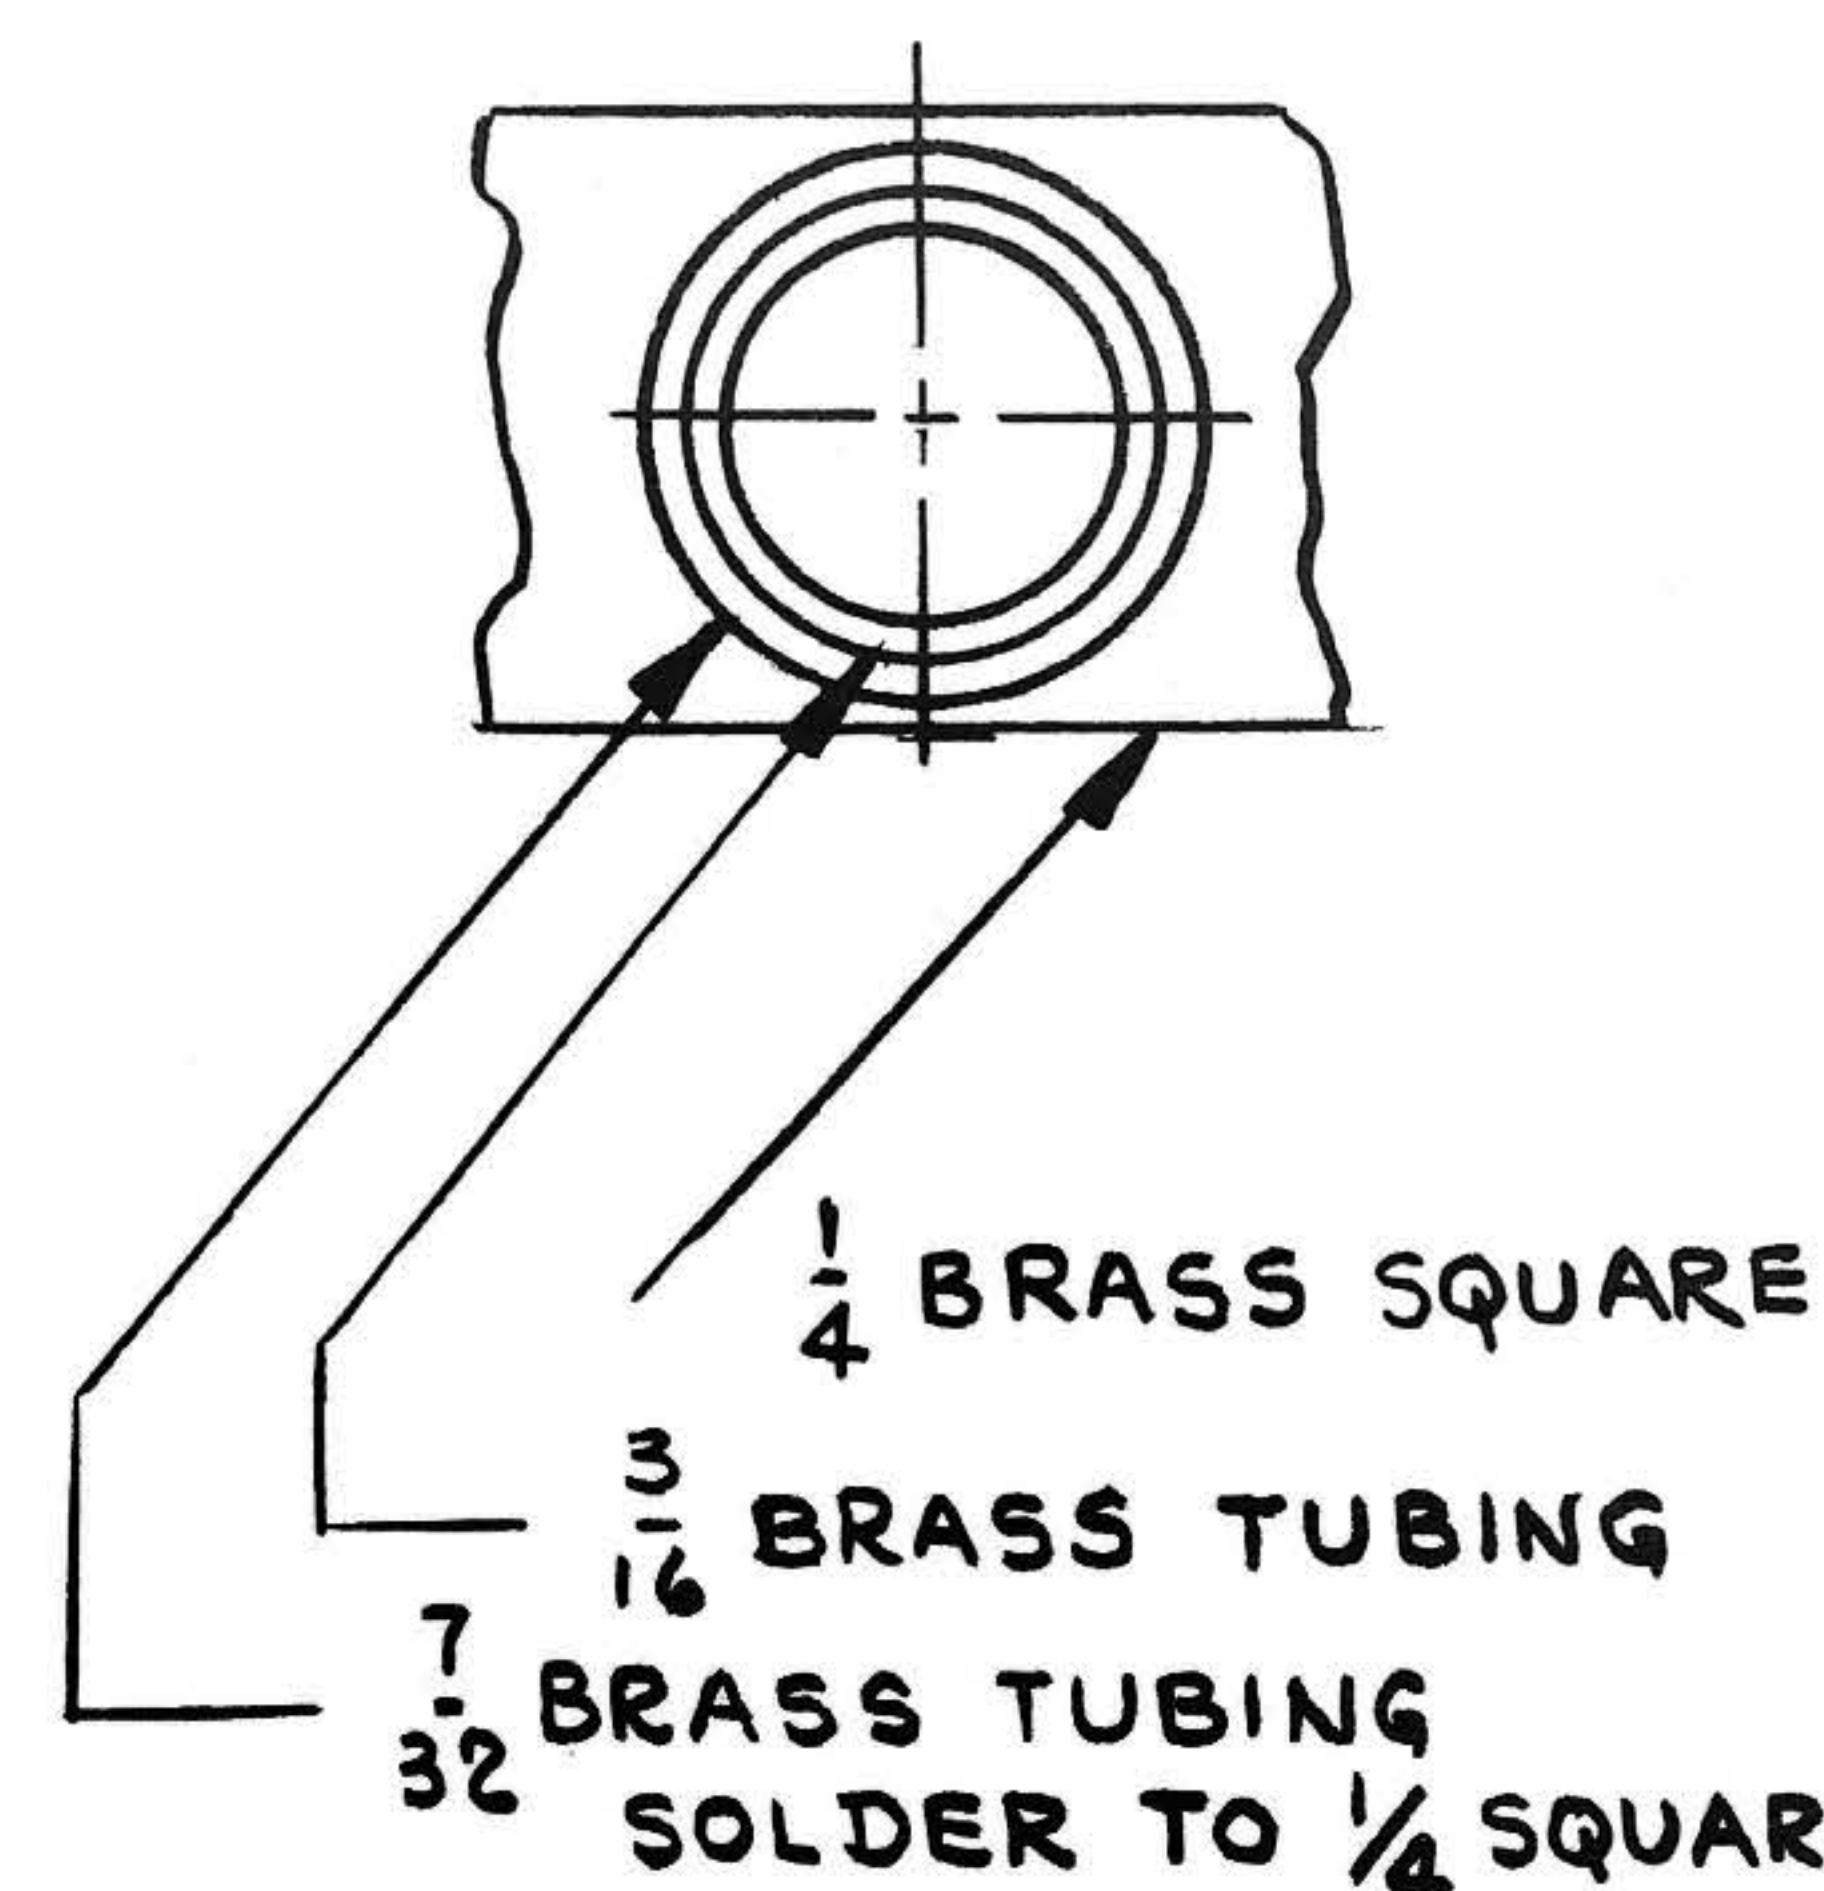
PINCH ROLLER ASSY CROSS SECTION
